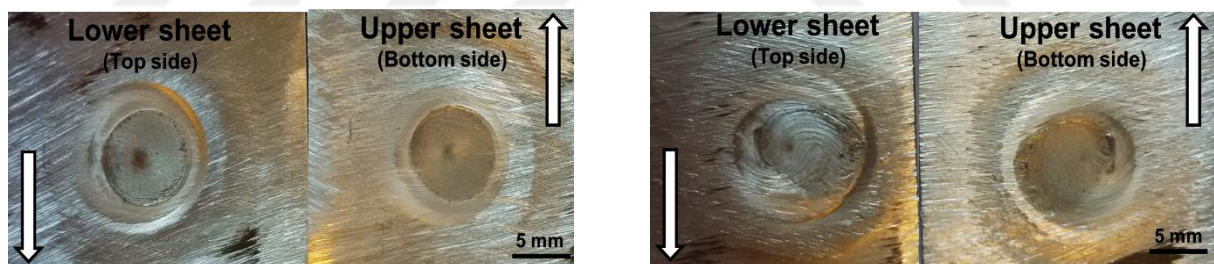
Fracture morphologies of the Al 6061-T6 welded joint after the shear-tensile test
